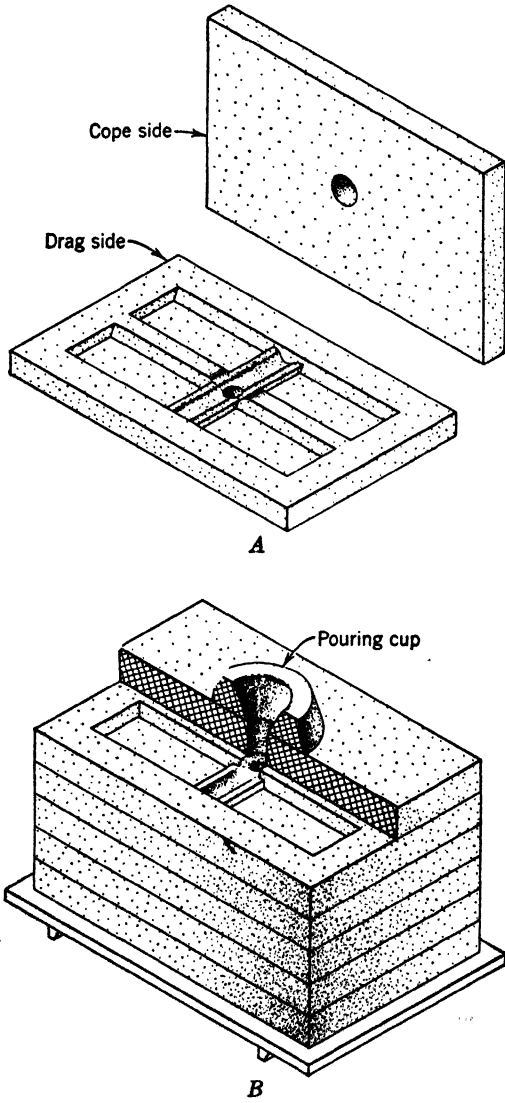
A. Slab core for stack mold. B. Stack mold.
